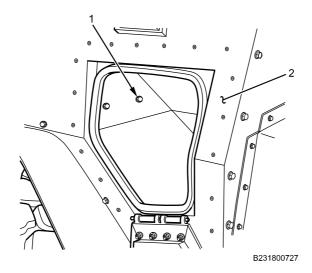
Left Side Rear Stowage Box Inside Bolts.
